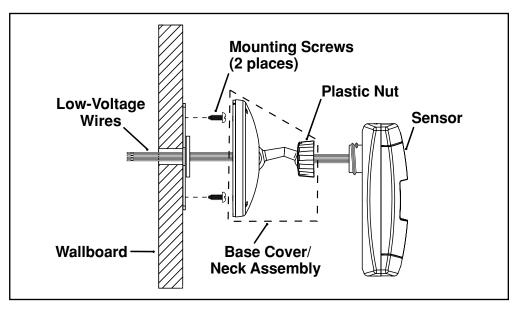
MC-W WALL MOUNT INSTALLATION
